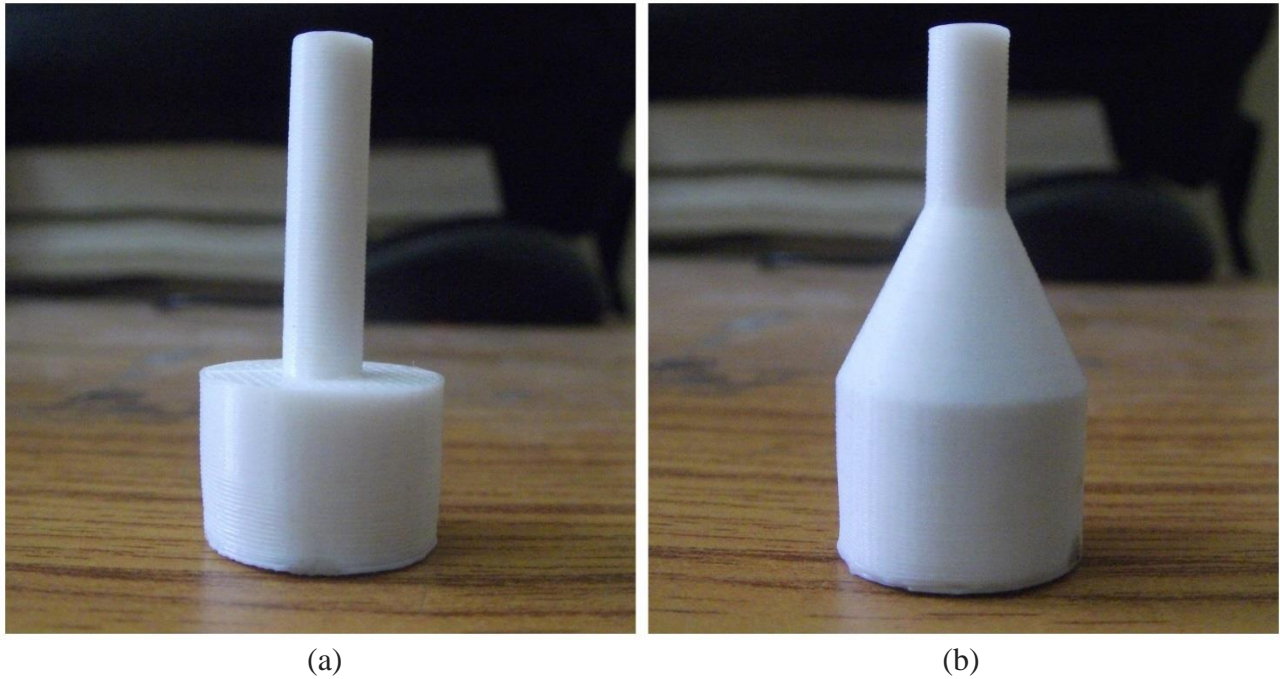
Parts fabricated in 3D printer (a) Desired, (b) Re-designed
